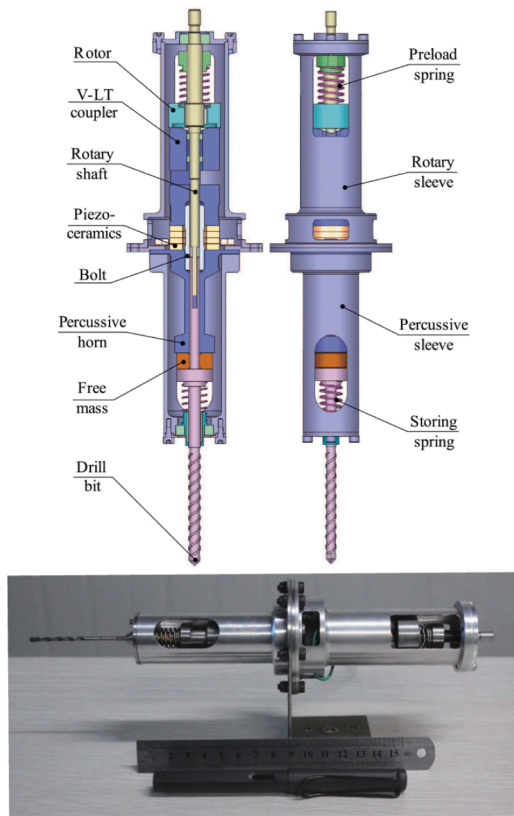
Rotary-Percussive ultrasonic drill by Wang Yinchao et al. in [151]: CAD drawing and assembled prototype. © 2021 IEEE. Reprinted, with permission from [151].”.
